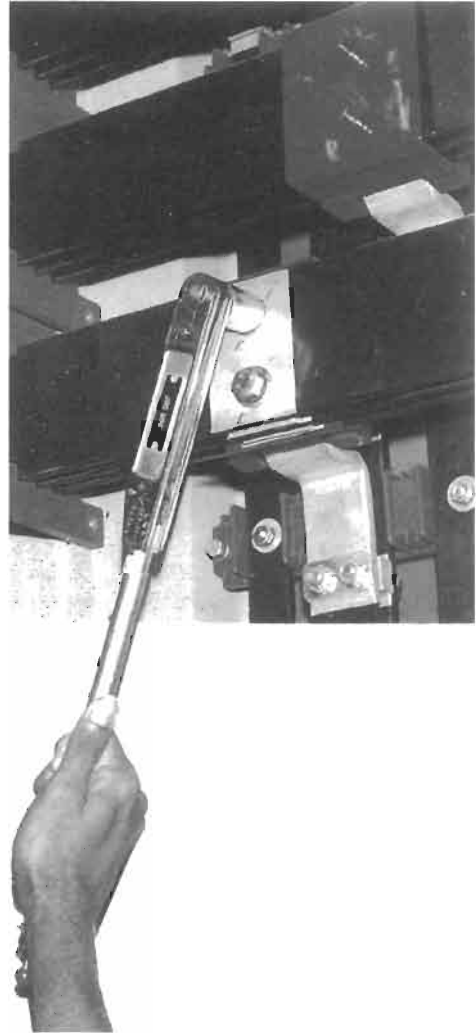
(c) Use of manual torque wrench to tighten the fasteners (motorised spanners are employed for faster production)
